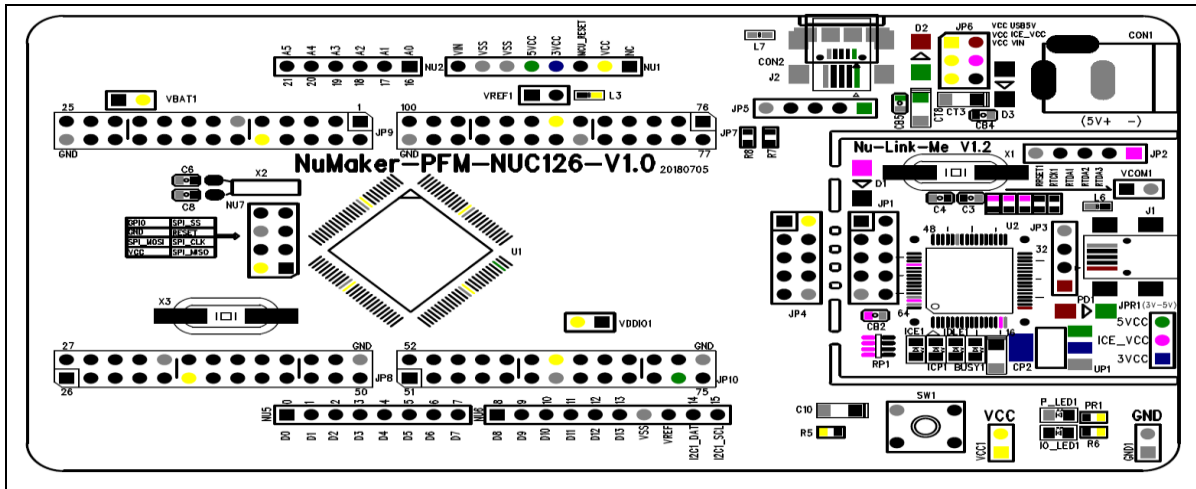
NuMaker-PFM-NUC126 Mother Board Placement - Front View
